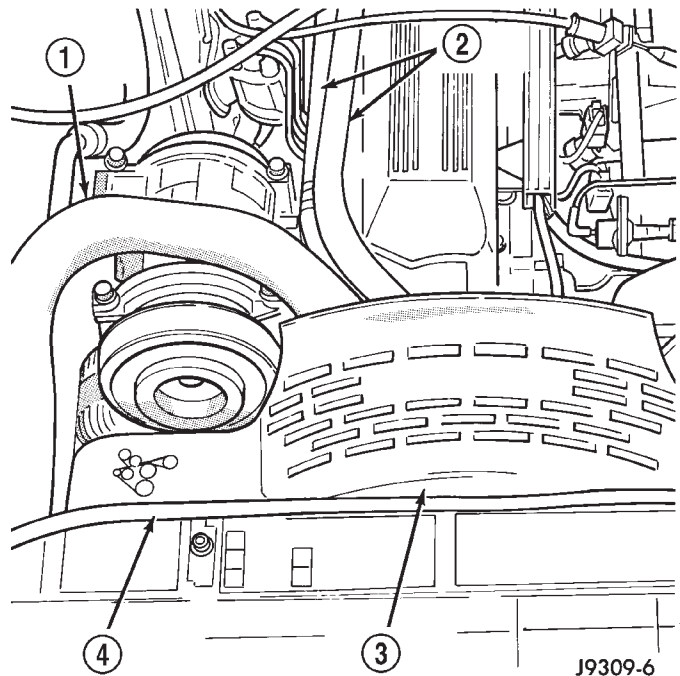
Upper Radiator Hose, Coolant Recovery Hose, Fan Shroud
